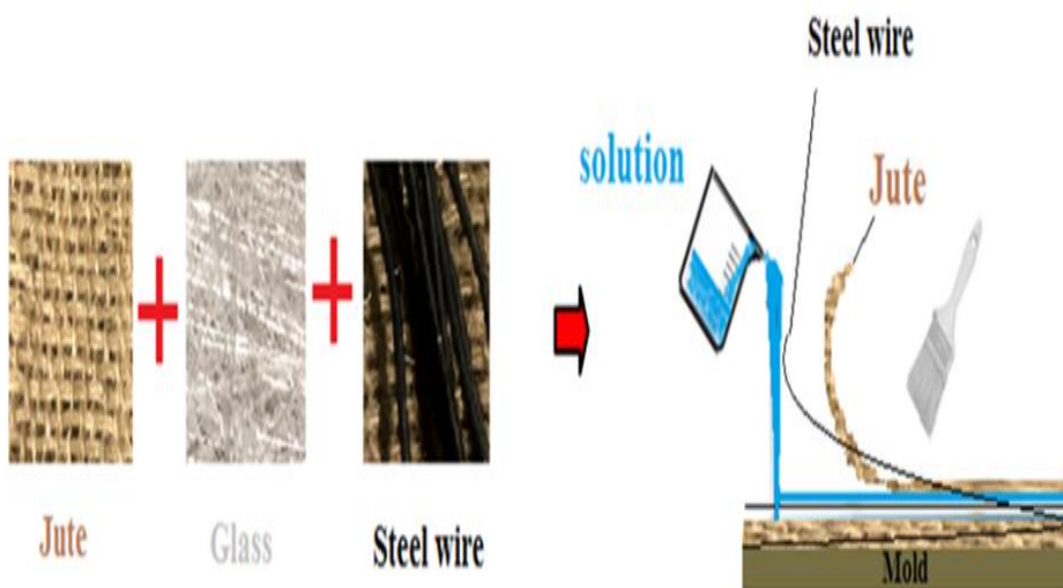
The photo of the Jute, Glass, and Steel wire and layer jute by hand lay-up method.
